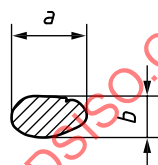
Weld defects that could also be found in DED AM processes
